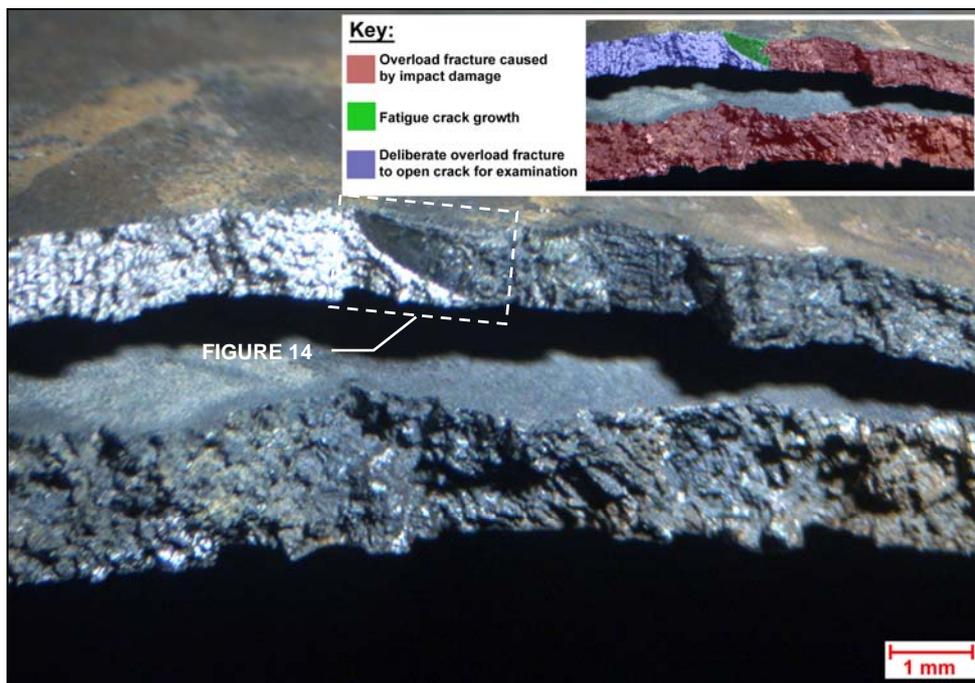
Blade C6406, close view of the region indicated in figure 12 (note – this photograph shows the opposite crack surface to that shown in figure 12). The inset shows the fracture mechanisms of the different regions of the crack surface. Note the thumbnail shaped region of fatigue crack growth.
